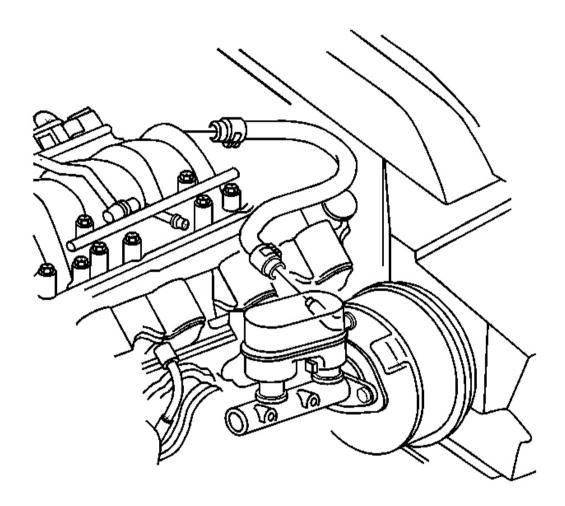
Vacuum Booster Hose Courtesy of GENERAL MOTORS CORP.
